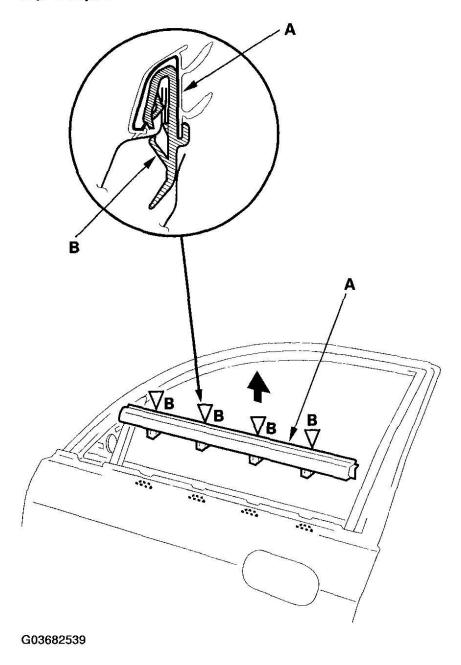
Removing Door Glass Outer Weatherstrip And Clips Courtesy of AMERICAN HONDA MOTOR CO., INC.
